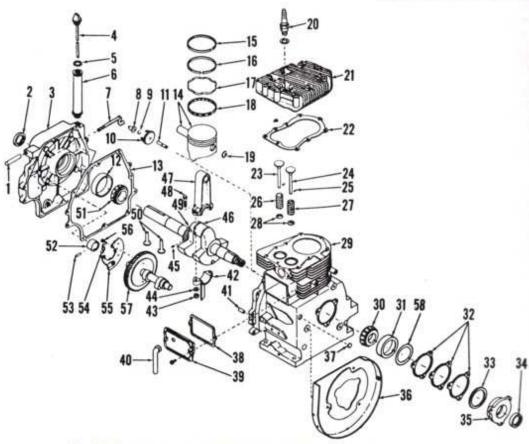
Exploded view of Model HH80, HH100 or HH120 horizontal crankshaft engine.
